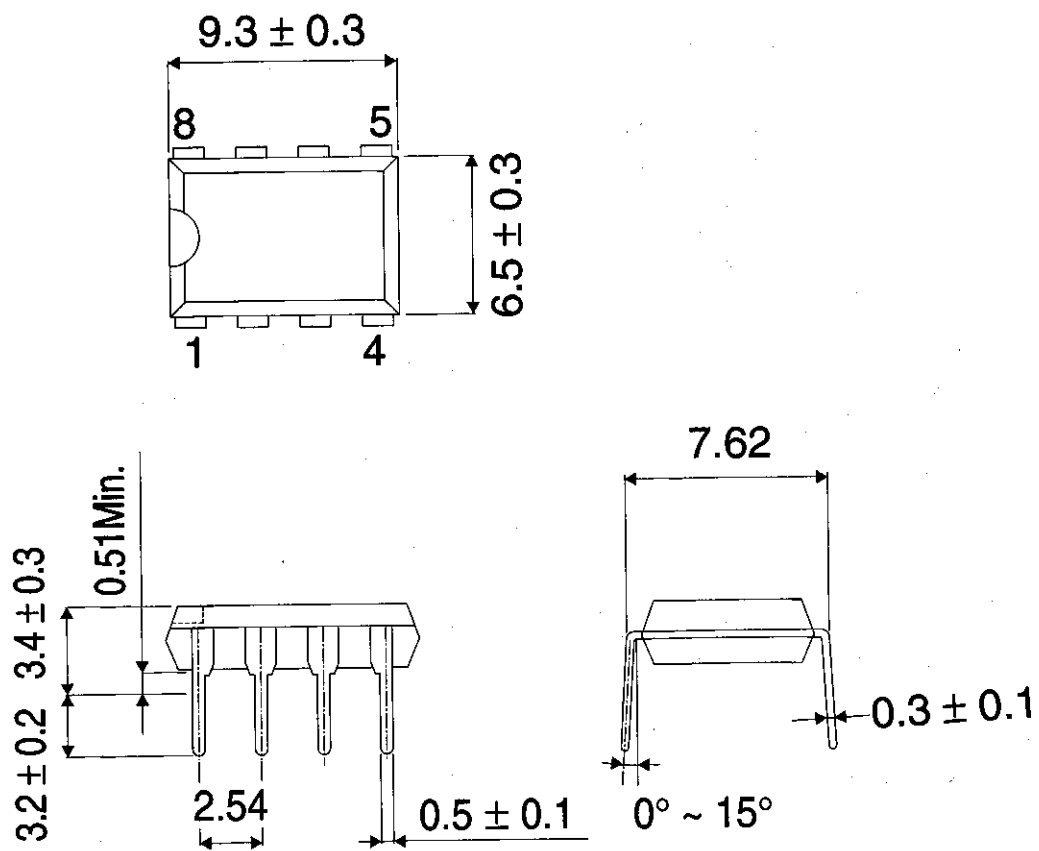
Outline Dimensions DIP8(BR9020-W)
